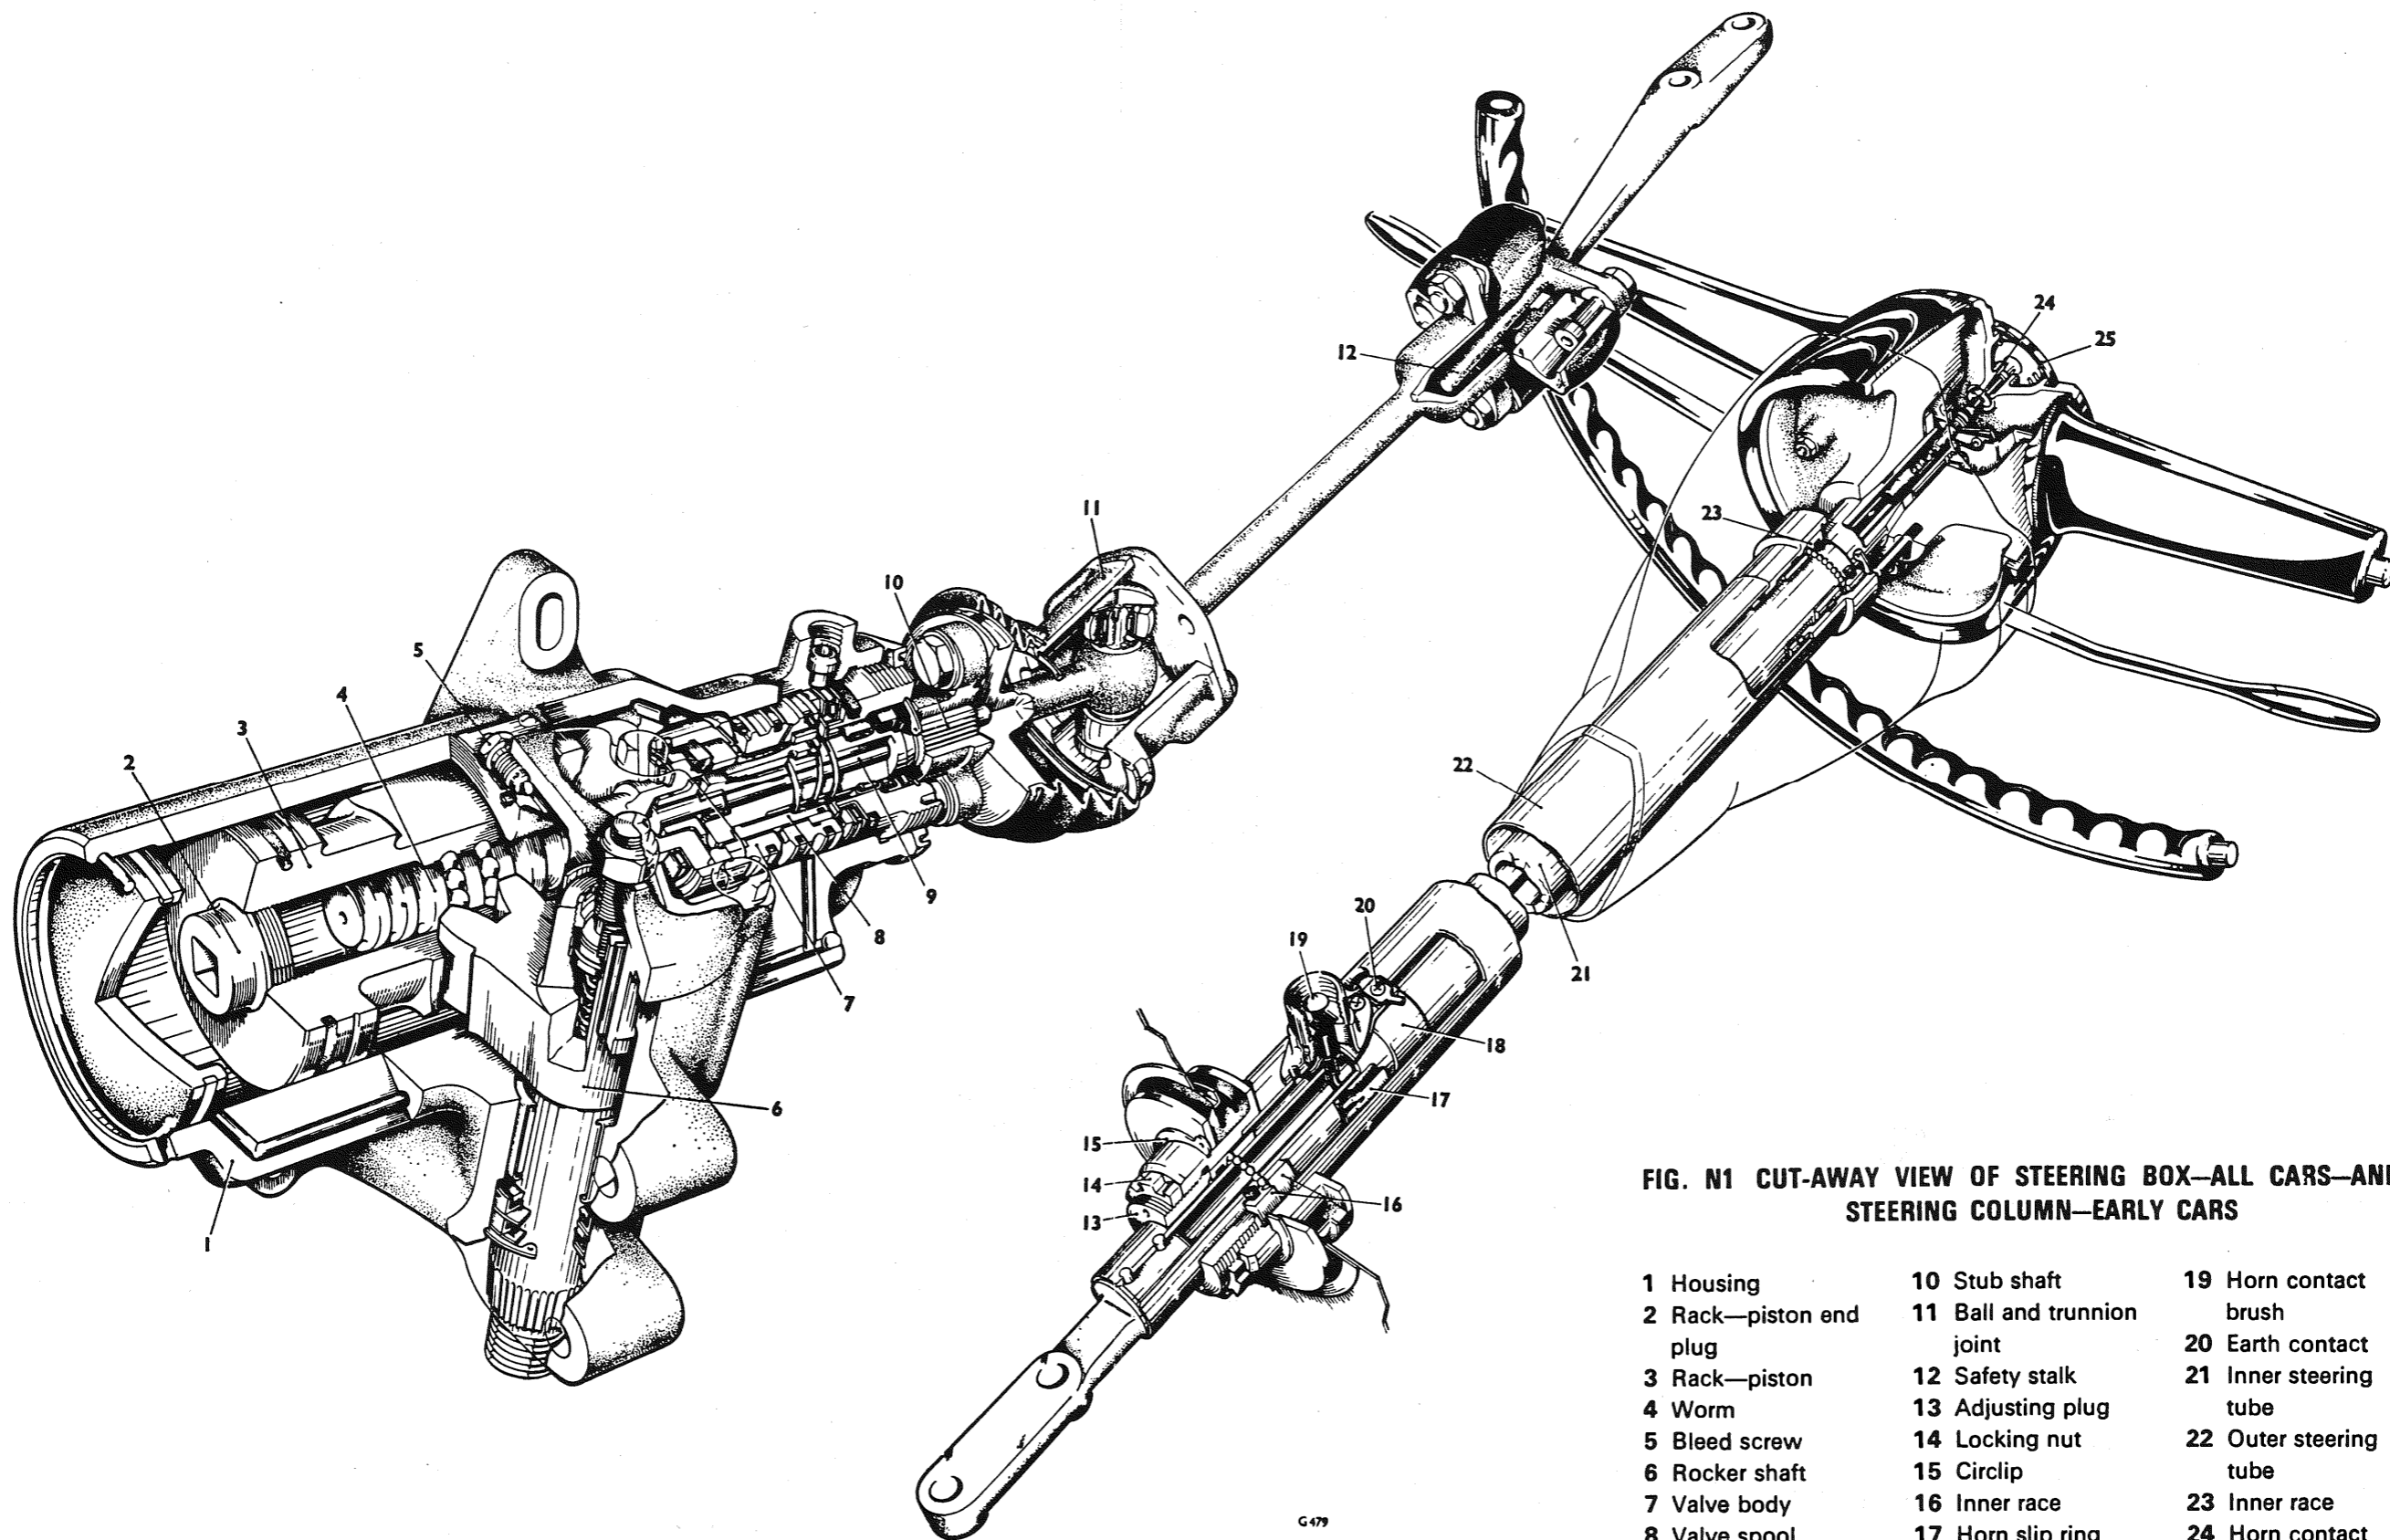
CUT-AWAY VIEW OF STEERING BOX—ALL CARS—AND STEERING COLUMN—EARLY CARS
